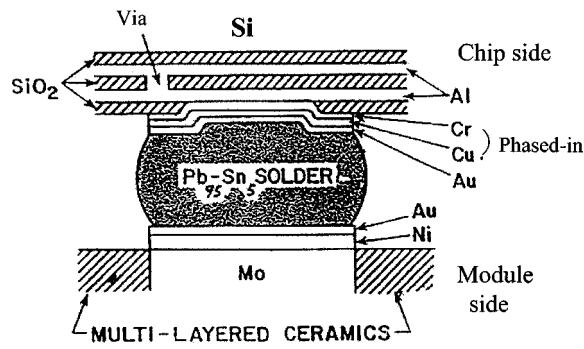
Schematic diagram of a 95Pb5Sn solder bump joining the thin film Au/Cu/Cu-Cr on a Si chip to a ceramic module.
